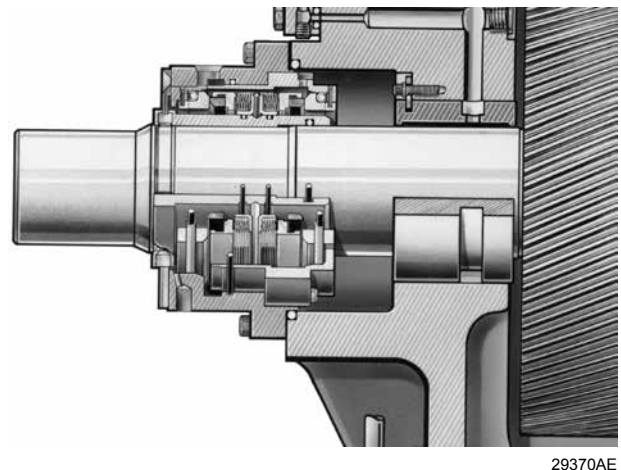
HF BEARING HOUSING DOWEL PINS
